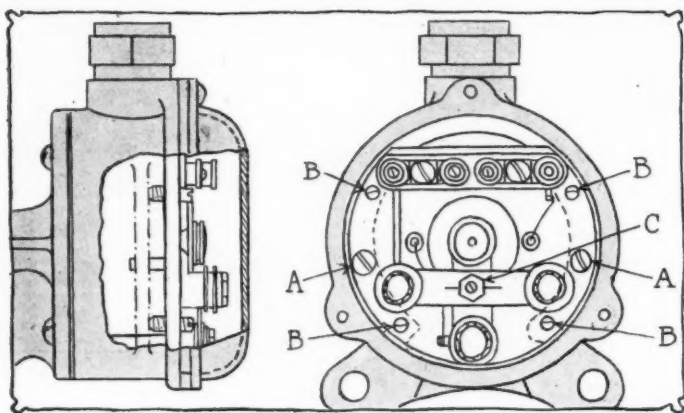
Points of adjustment on Holtzer-Cabot horn
